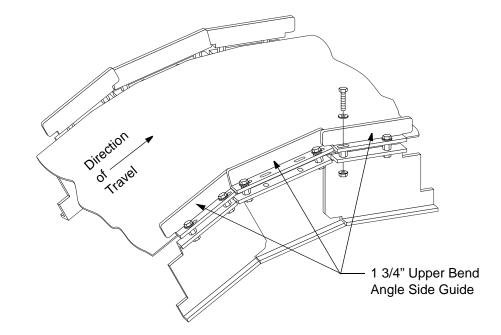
Upper Bend Unit with 1 3/4" Angle Side Guides, Spaced Mounting
